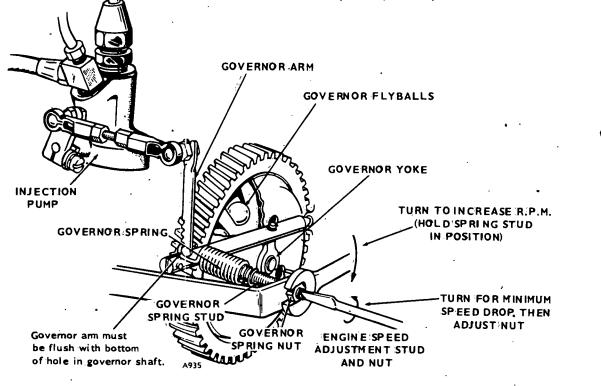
GOVERNOR ASSEMBLY (PRIOR TO SPEC R)
